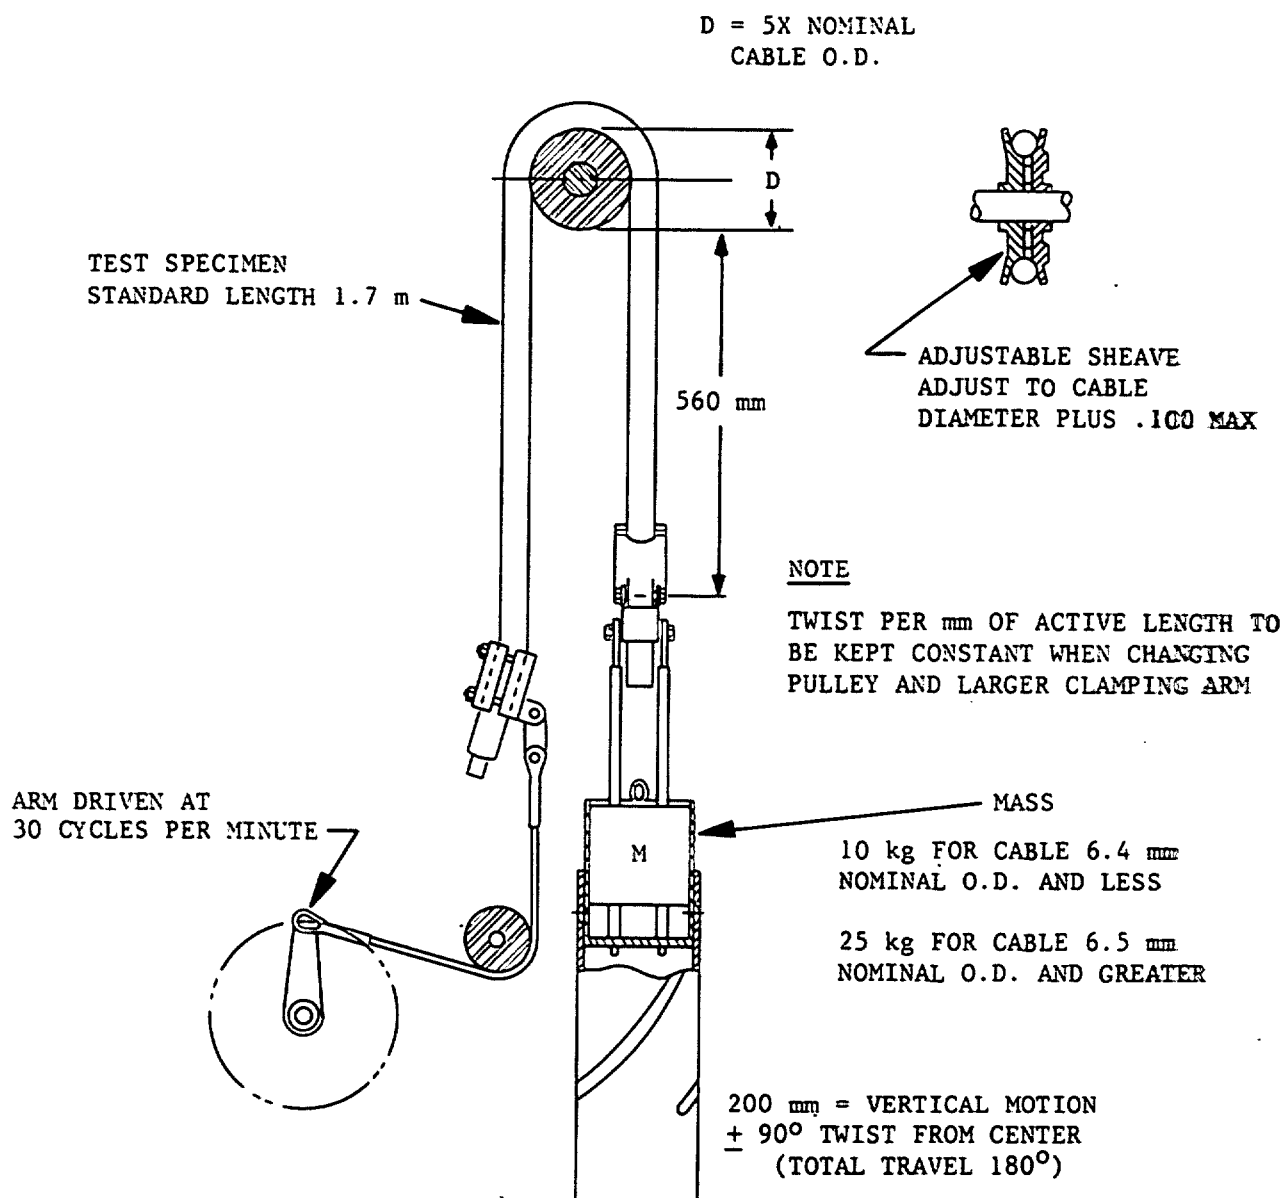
Twist-Bend, Test, Fixture, Cable Testing
